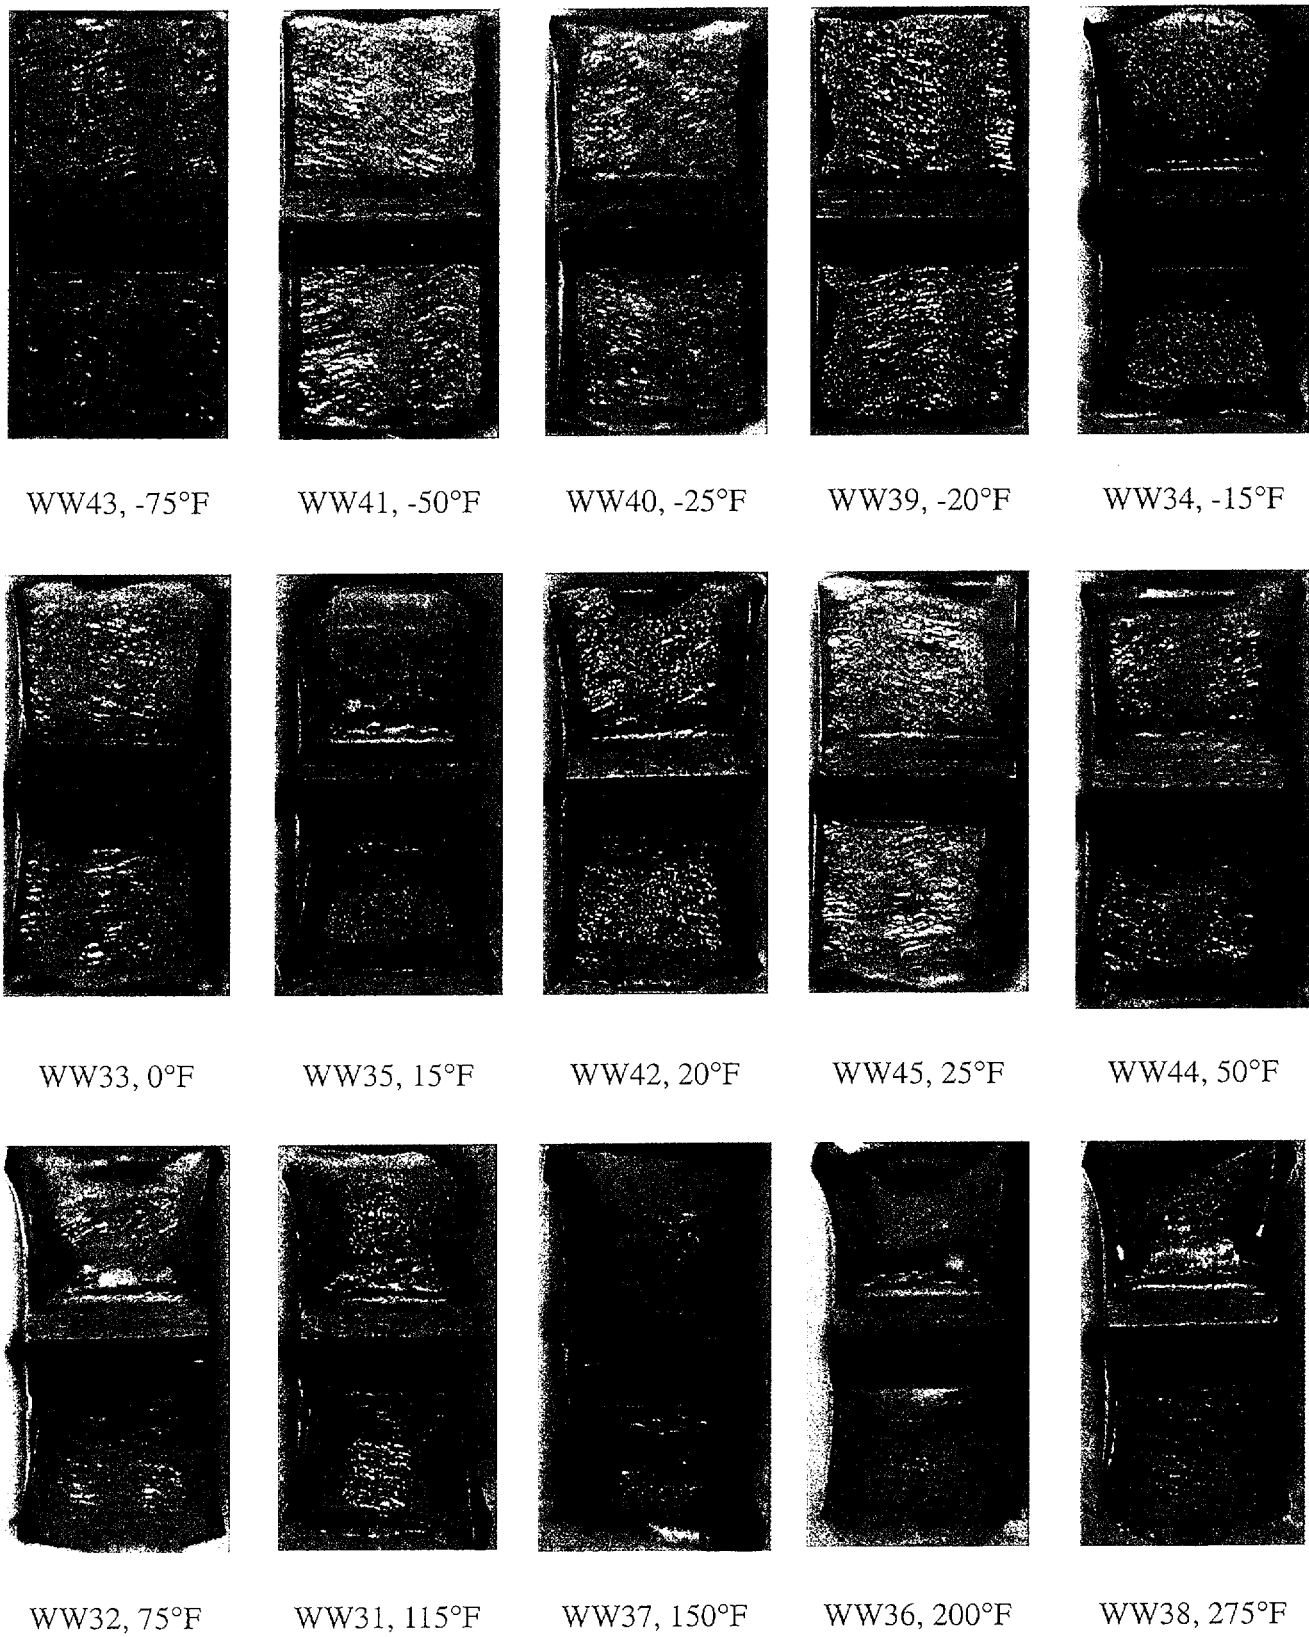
Charpy Impact Specimen Fracture Surfaces for Beaver Valley Unit 2 Reactor Vessel Weld Metal Specimen
